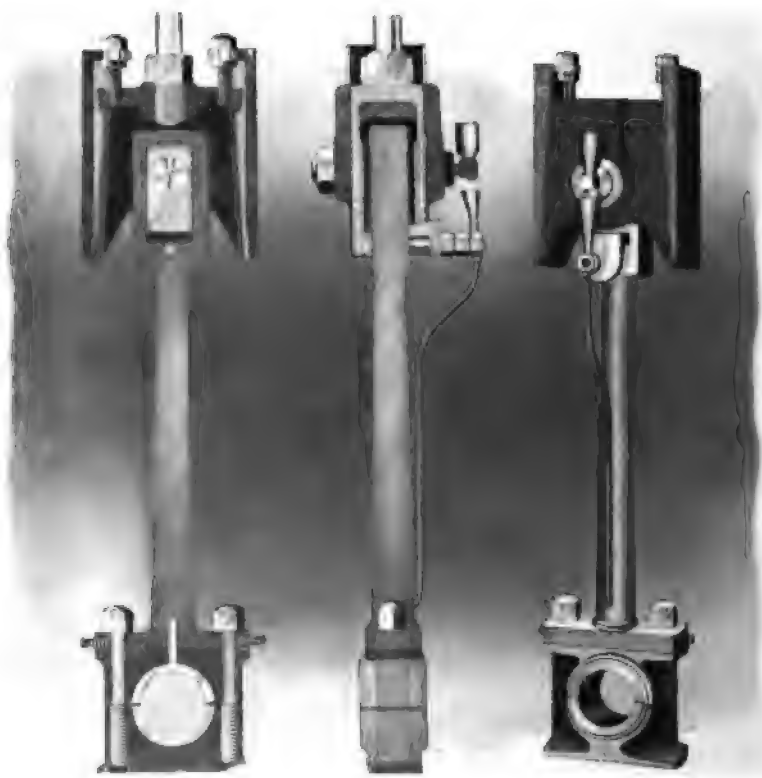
THE CONNECTING ROD OF THE TROY ENGINE
